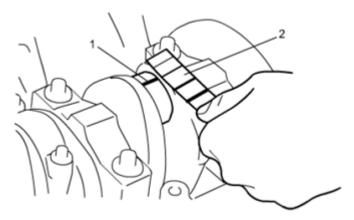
Measuring Connecting Rod Bearing Clearance Courtesy of SUZUKI OF AMERICA CORP.
